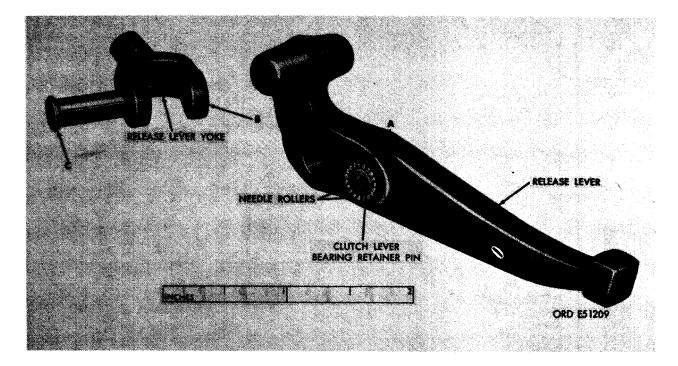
INSTALLING RELEASE LEVER NEEDLE ROLLERS AND YOKE USING BEARING RETAINING PIN.
